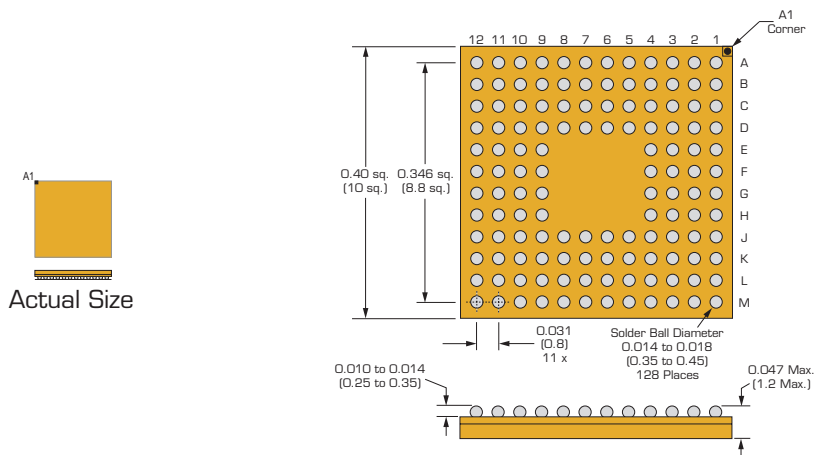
M3001 TFBGA-128 Dimensions, BGA Bottom View.
